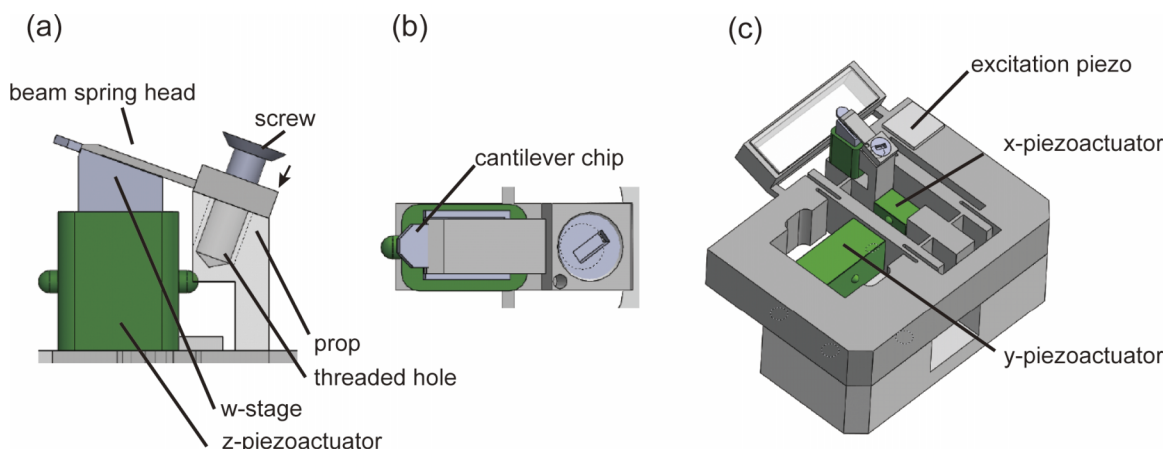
Schematic diagram of the scanner with single-prop holding mechanism. (a) Side view, (b) top view, and (c) whole view.
